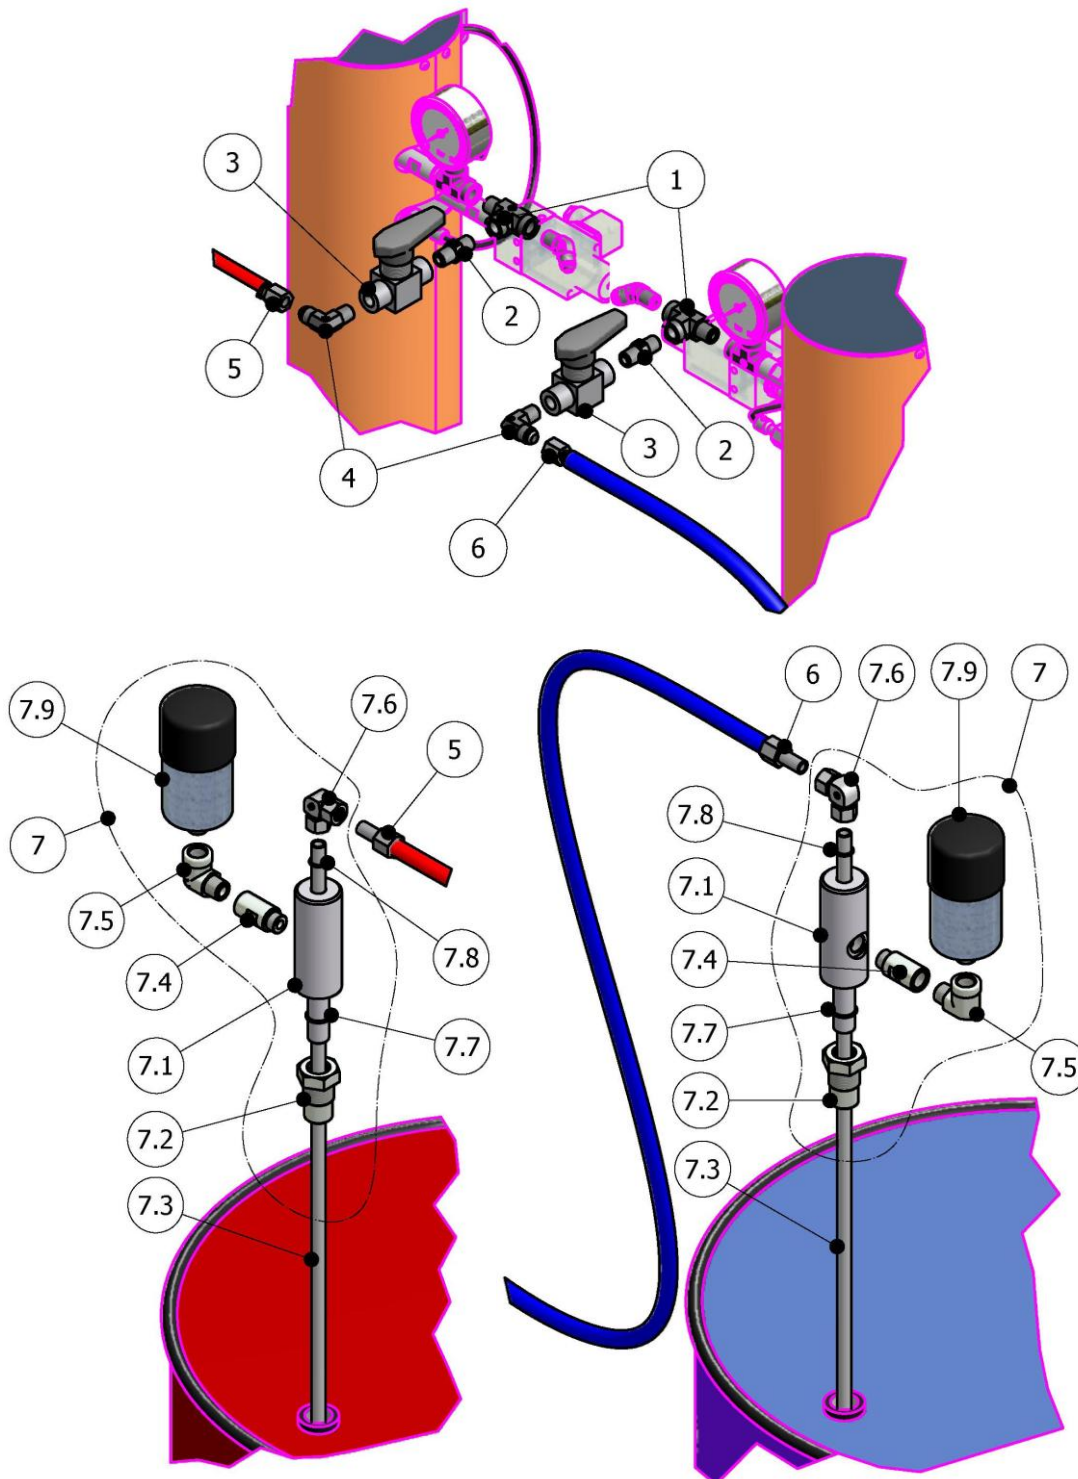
Recirculation Kit P#: KT-00038-01, Exploded View
